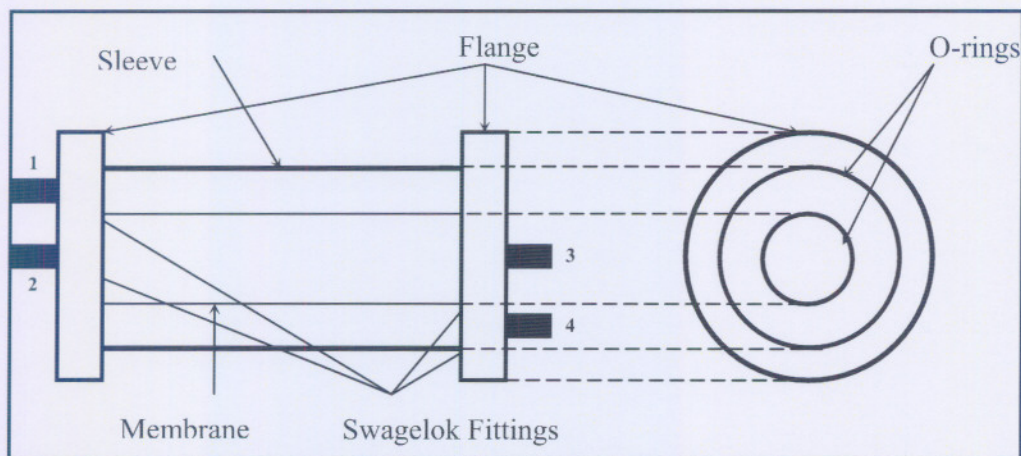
Schematic drawing of membrane module (and fitting positions) with a side view of the assembled module on the left and a top view of the flange head on the right.
